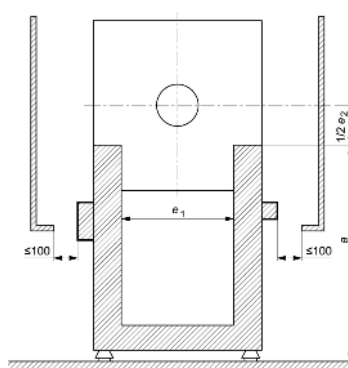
Dimensions a , e_1 and e_2 for machines without tie-bars
